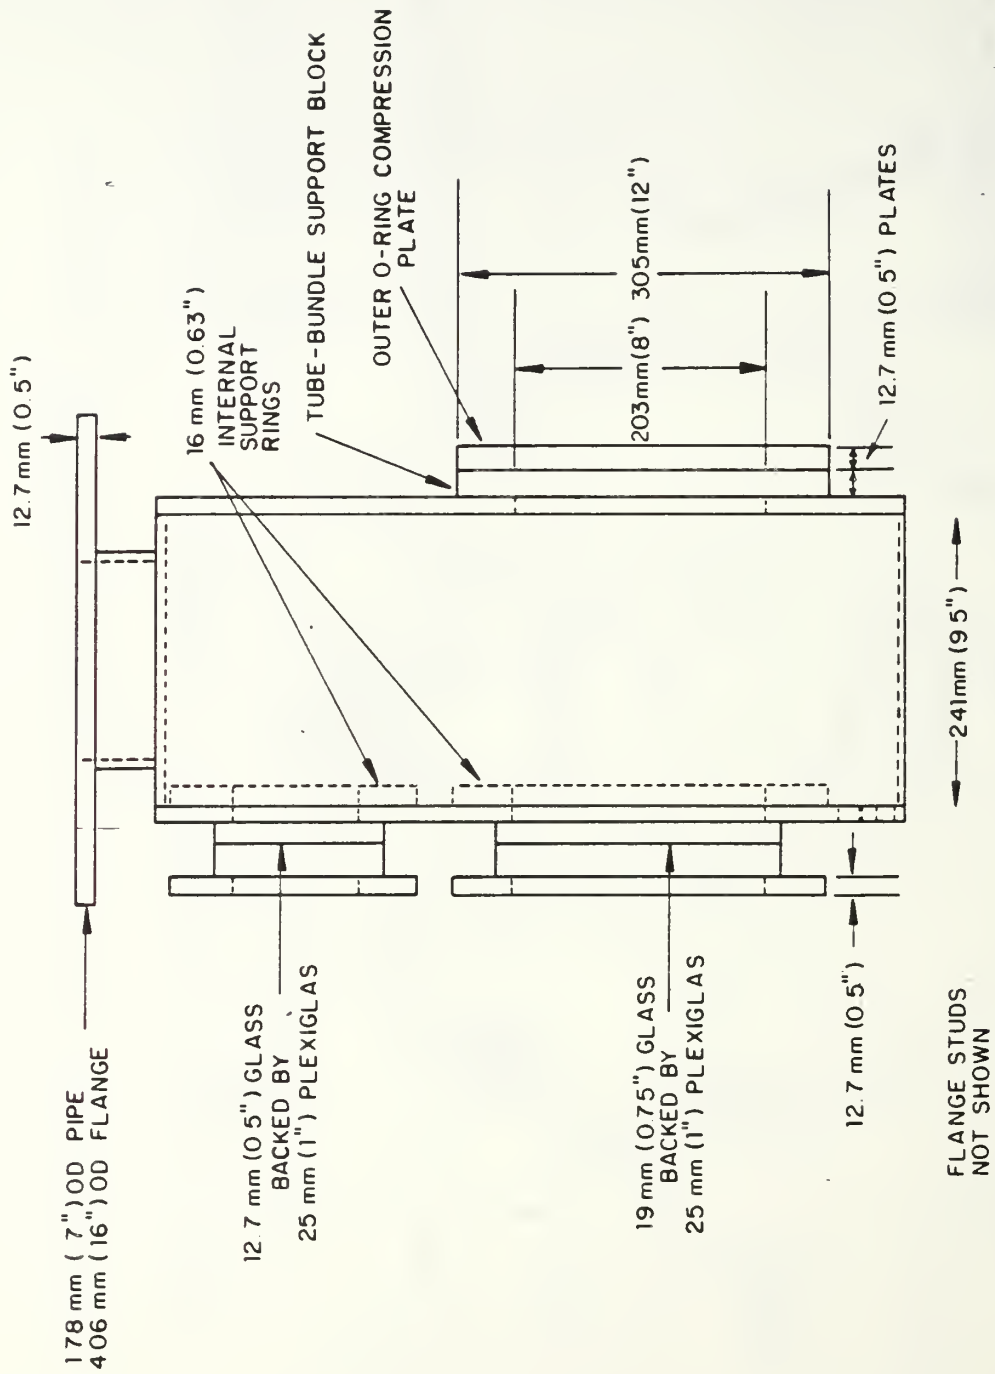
End View of Multi-Tube Apparatus Evaporator
